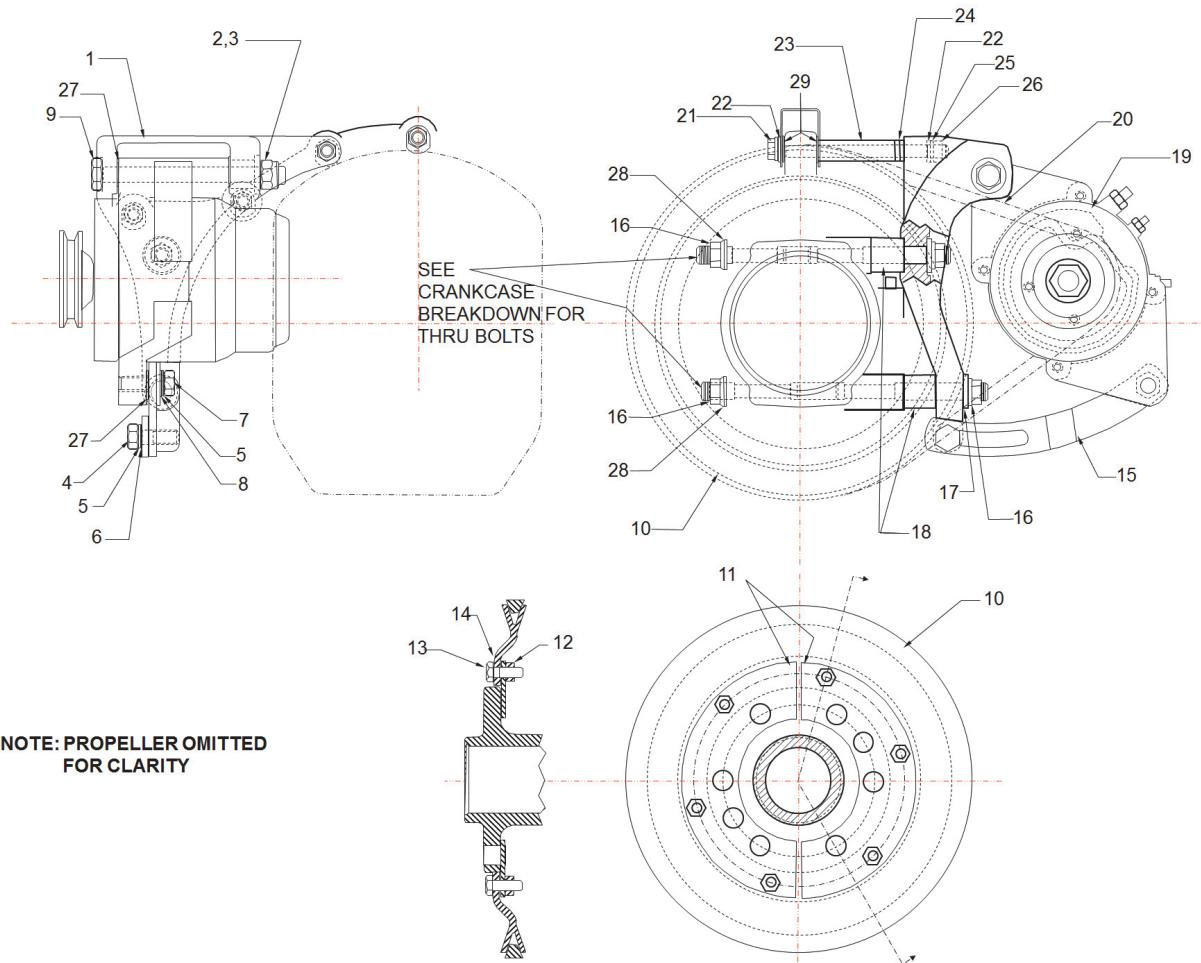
70 Amp Belt Driven Alternator Bracket Assembly
